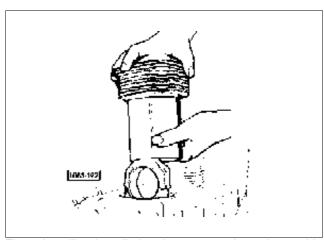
Installing the cylinder-piston-connecting rod assembly in the engine block;
